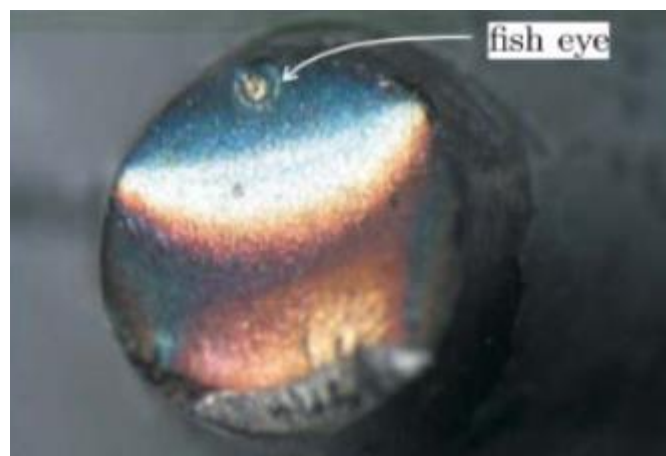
Fracture Surface in VHCF showing Fish-Eye [31]
